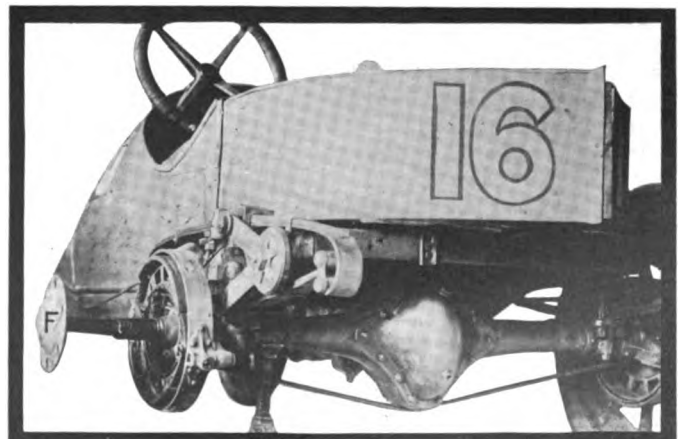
Rear axle details of Mason racer with axle drive shaft withdrawn, showing integral, drive shaft flange F, which simply drives the wheel
